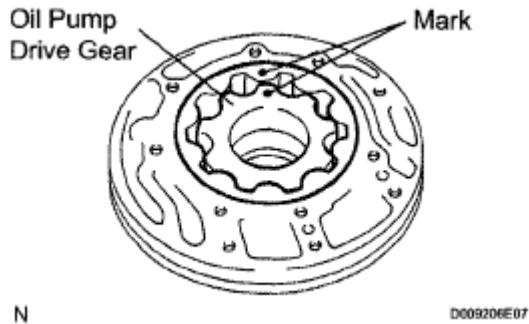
Coating Front Oil Pump Drive Gear With ATF To Oil Pump
